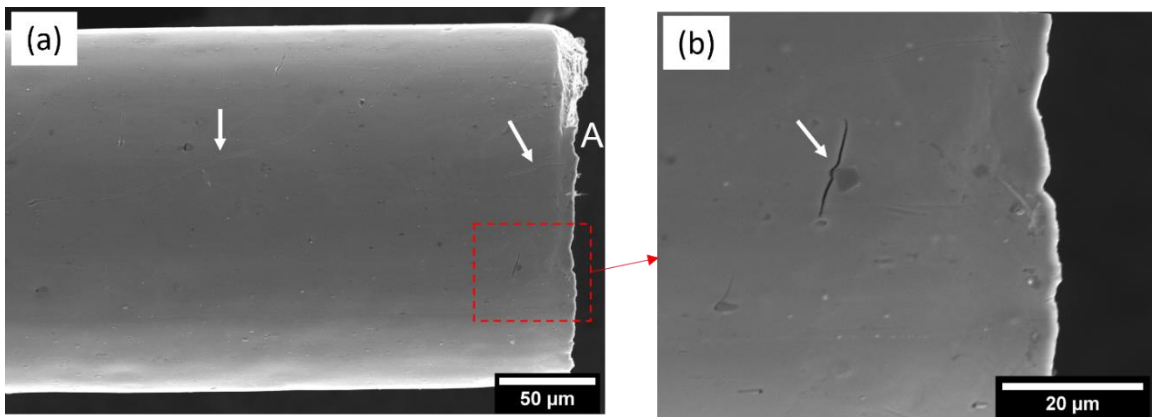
(a) longitudinal fracture surface of the electropolished 0.2mm wire (b) a crack that initiated at the corner of a surface inclusion.
